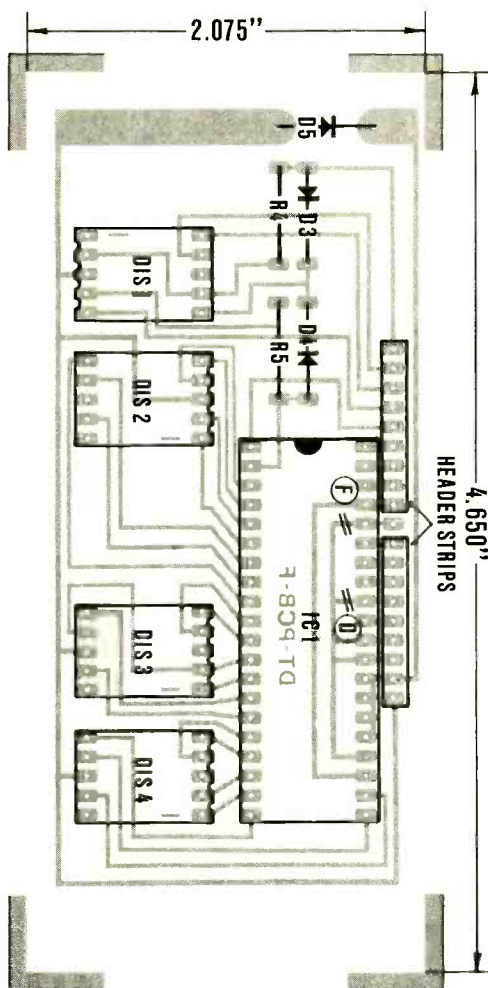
THE CLOCK IC, four displays and five other components are on the front PC board.
